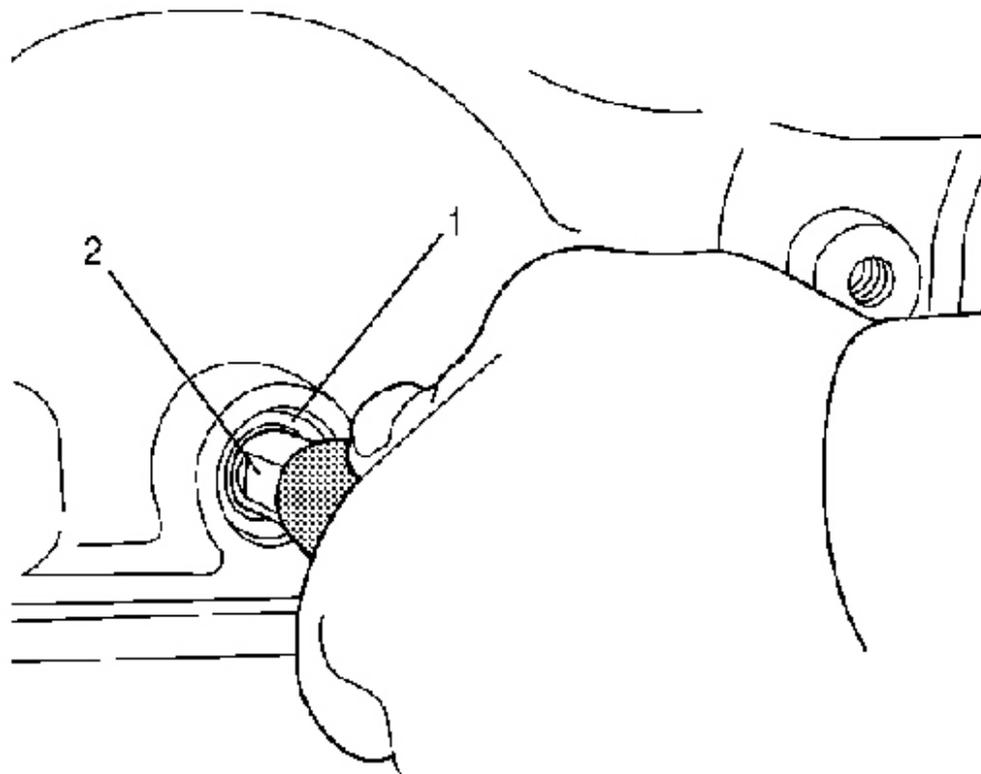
Sliding Seal Remover Tool Over The Selector Shaft
